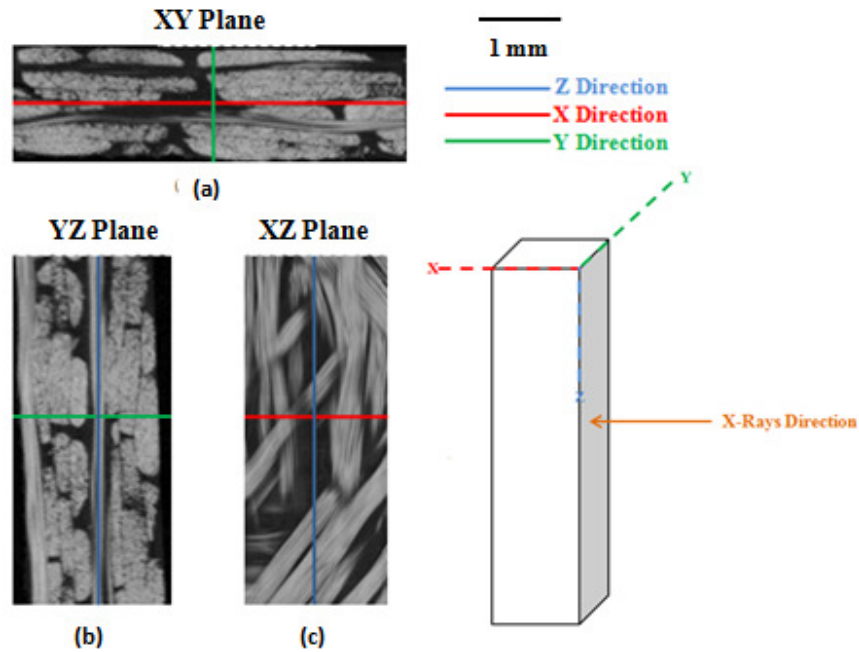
Two dimensional slices of 2mm undamaged glass/epoxy laminate reconstruction (a) XY plane (b) YZ plane (c) XZ plane
